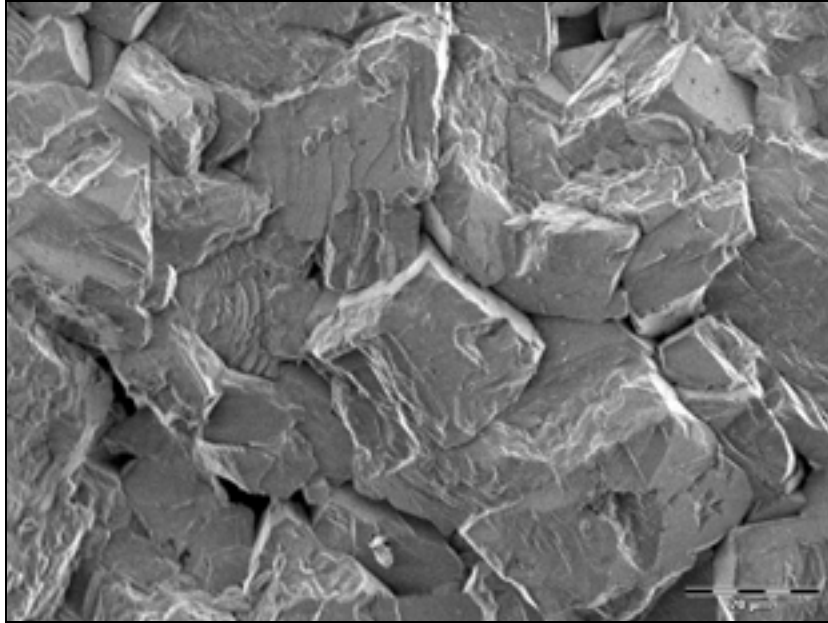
ESEM photo of fracture surface for type I.
